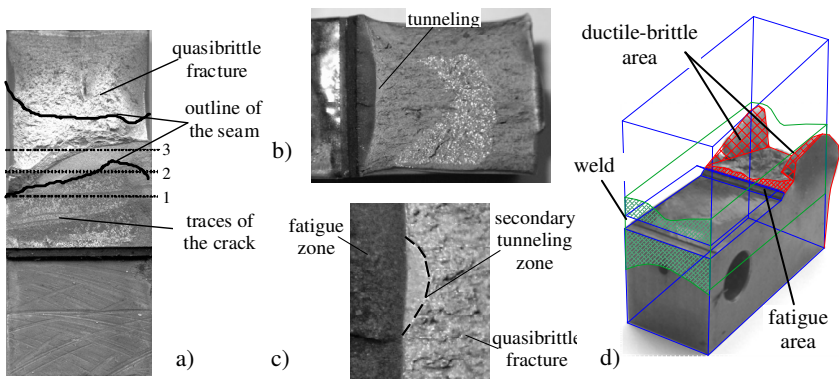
Fracture surface of the specimen: a) when crack grows perpendicular to the weld (1, 2, 3 – crack's depths are indicated); b) with tunneling effect; c) increased area with secondary tunnelling features; d) as crack growth is initiated along the welding seam
